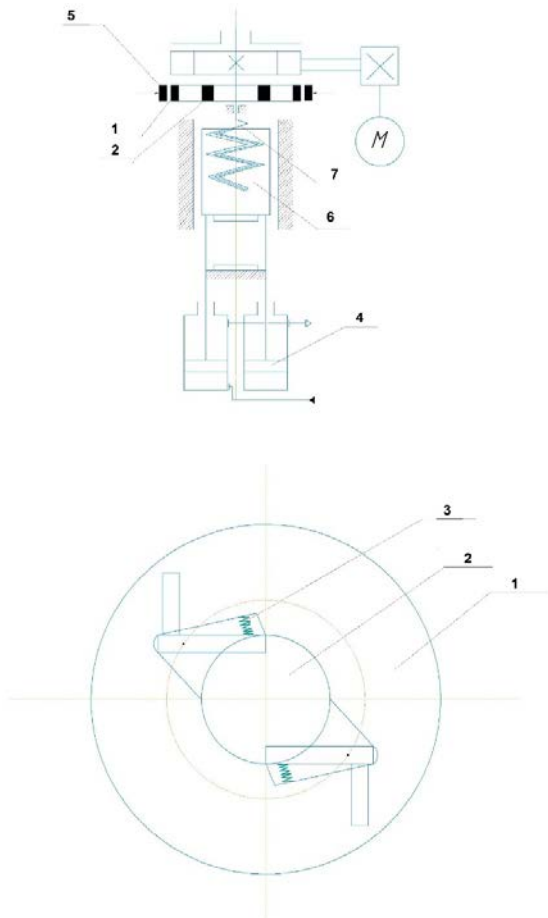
Slider construction: 1 – outer handwheel; 2 – inner handwheel; 3 – keyway; 4 – drive; 5 – brake; 6 – slider; 7 – screw
